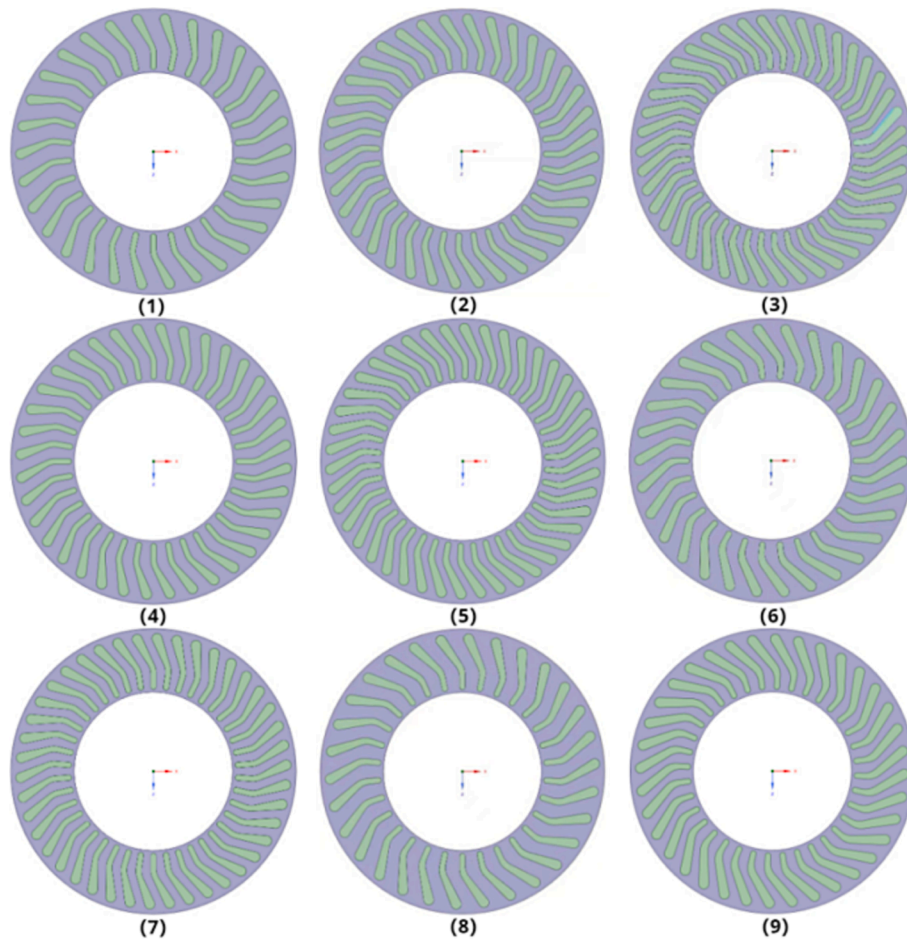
Cross sectional view of the Taguchi L9 design for radial ventilated brake disc.
